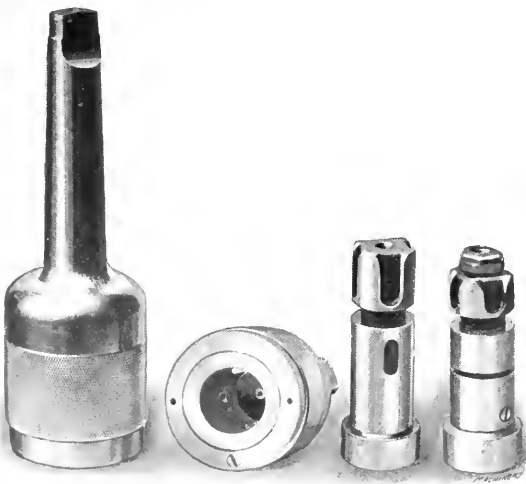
Horton Chuck and Drilling and Tapping Collets
